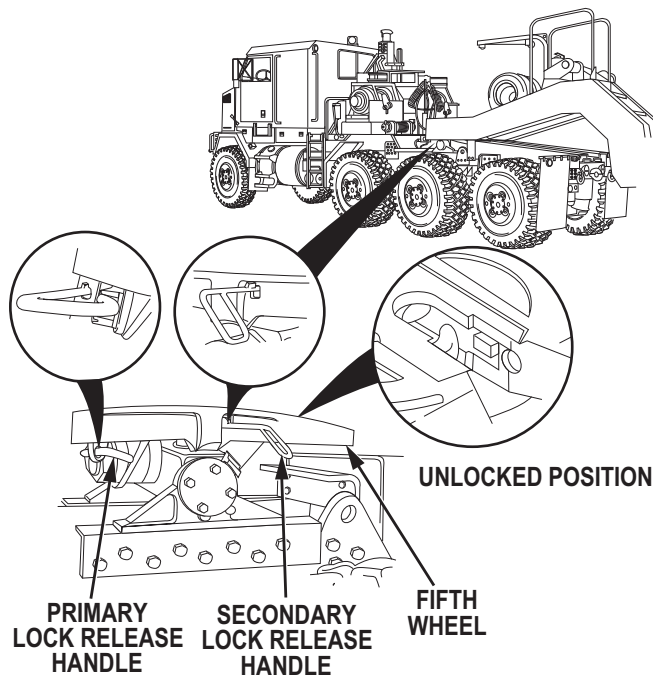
Fifth Wheel Primary and Secondary Lock Release Handles.
